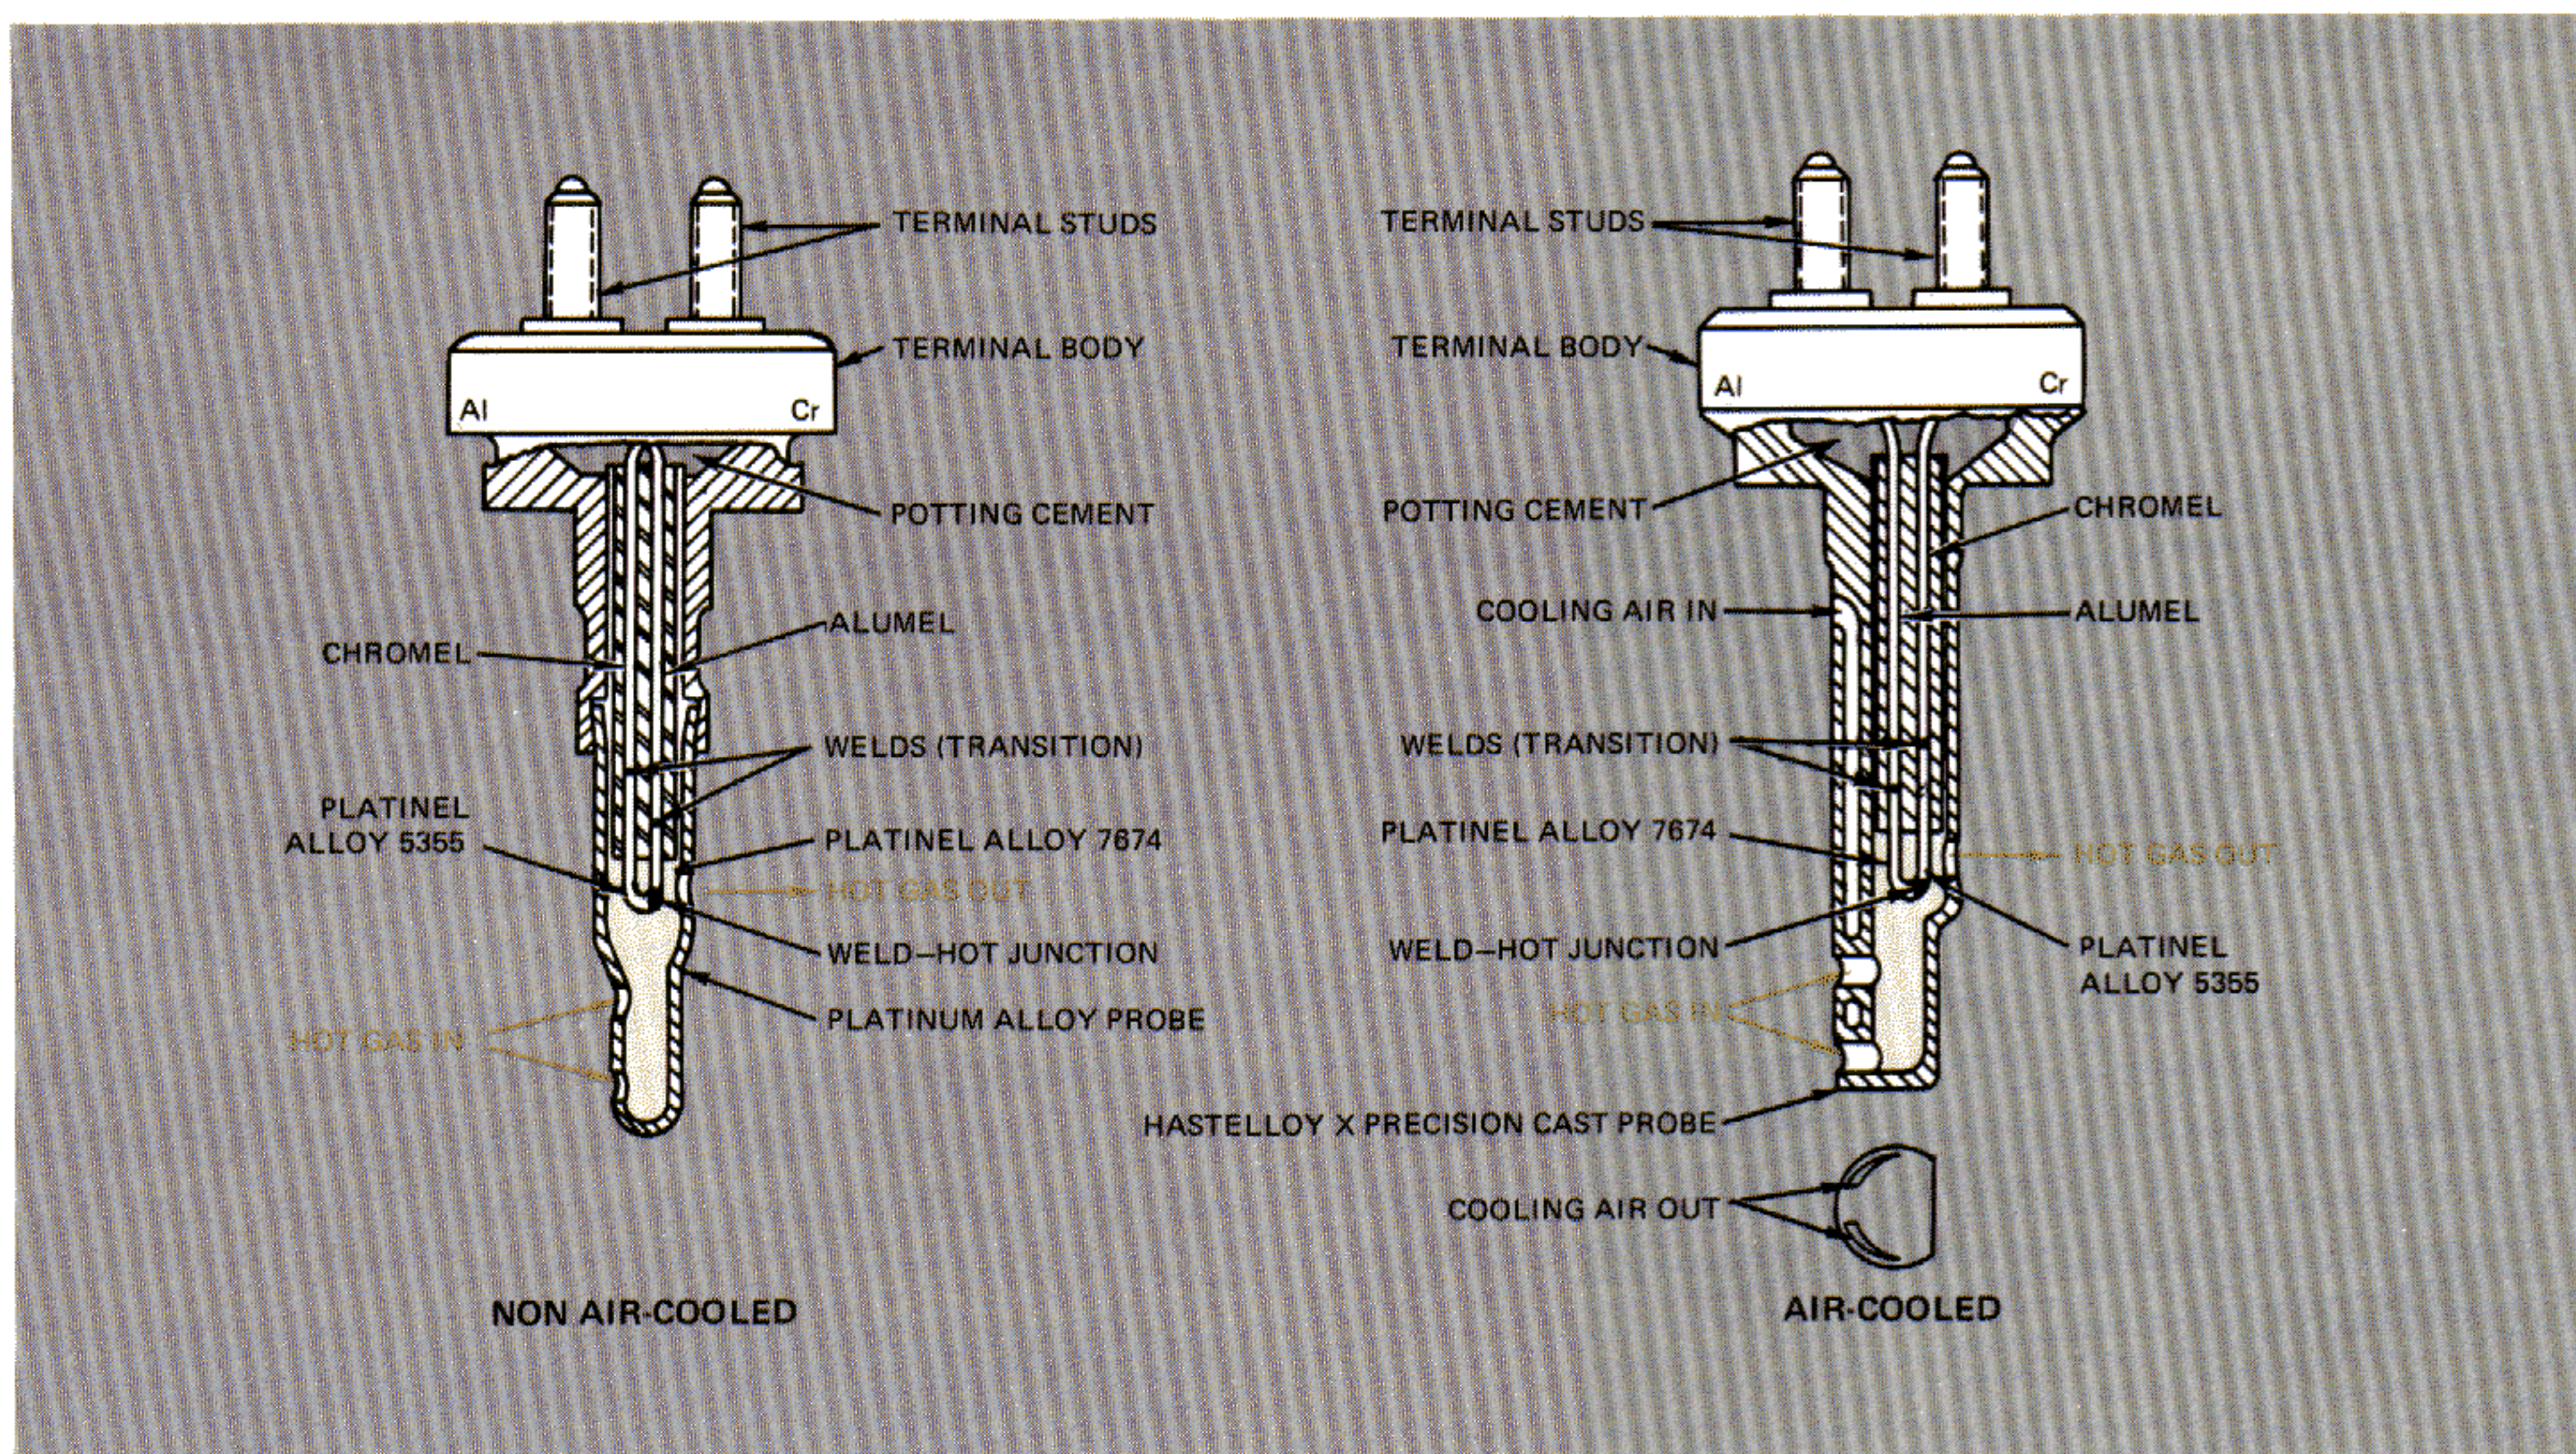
Cross-Section Views of T56-A-14 Thermocouples – Older Nonair-Cooled Type (l.) and Later Air-Cooled Type (r.)
